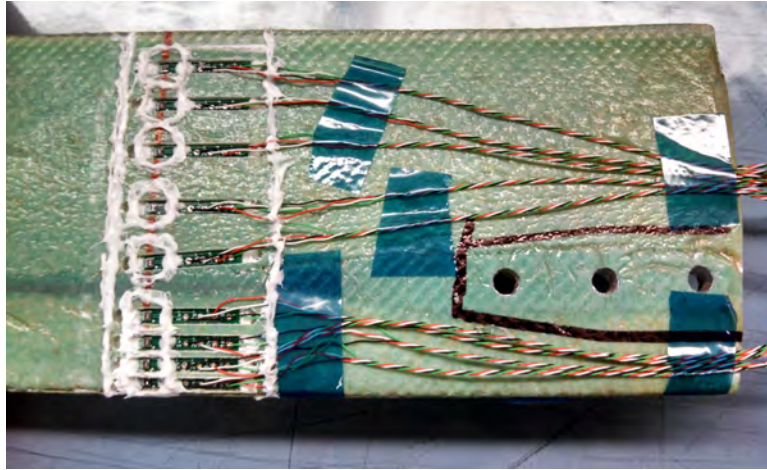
Blade core with pressure sensors mounted in the milled pockets. Silicone sealant surrounds the sensors to seal them , and to protect them from the epoxy bonding operation.
